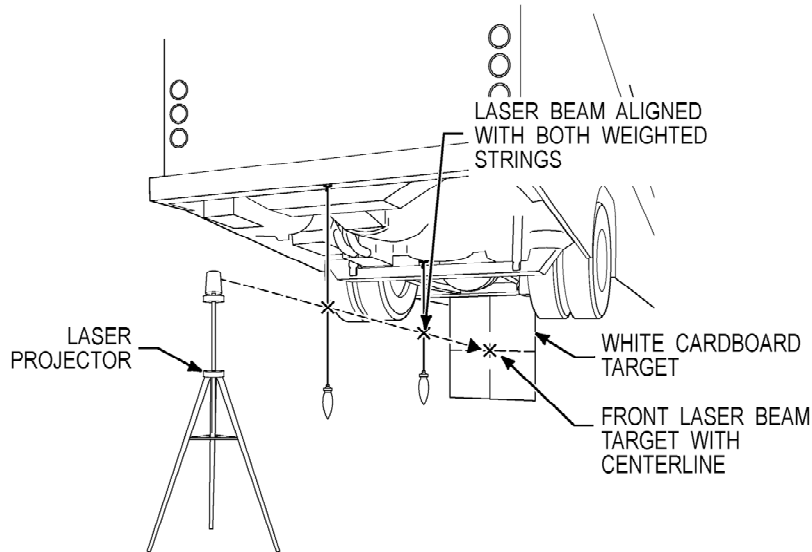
Locating and Marking the Center of the Engine Crankshaft
